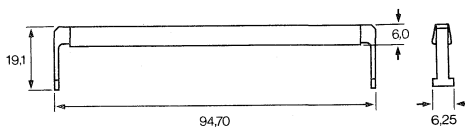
Strain relief, to be used with the free cable version shown in Fig. 1.
